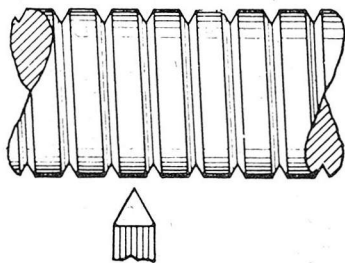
Adjusting Point of Threading Tool to Conform with Thread
